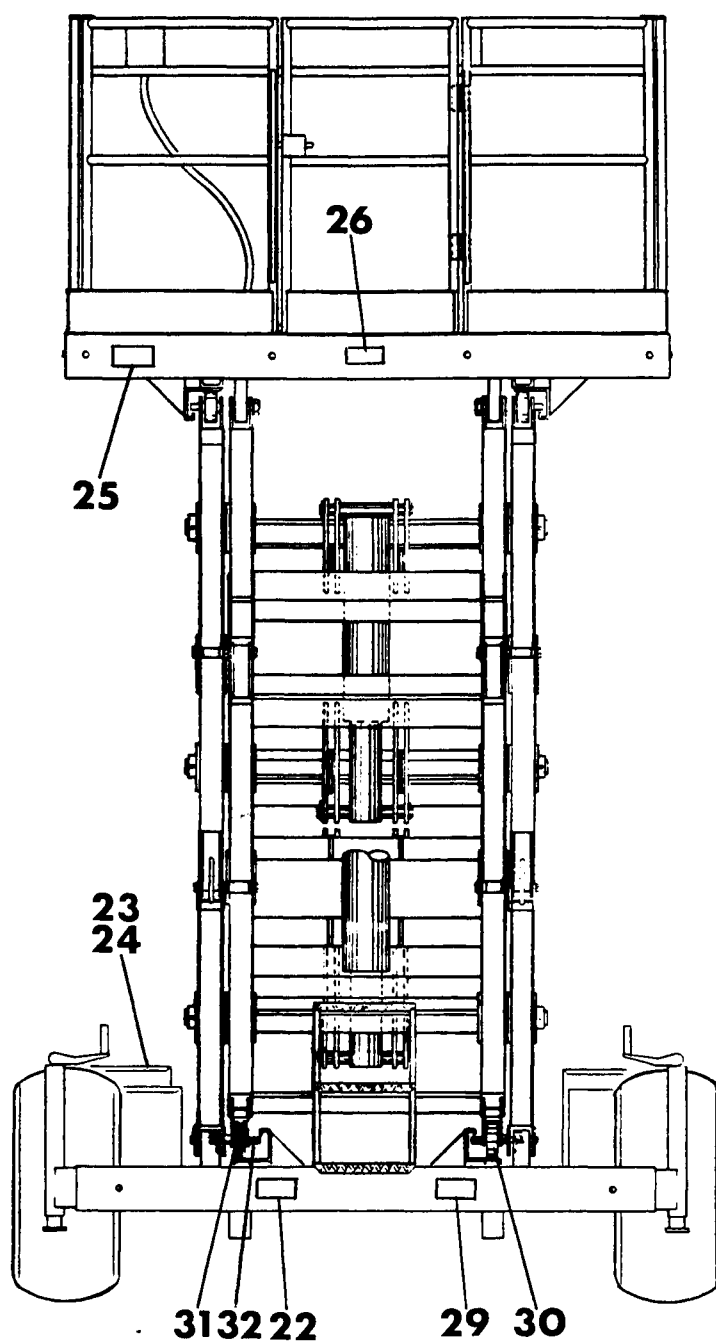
FINAL ASSEMBLY (RT26E)
